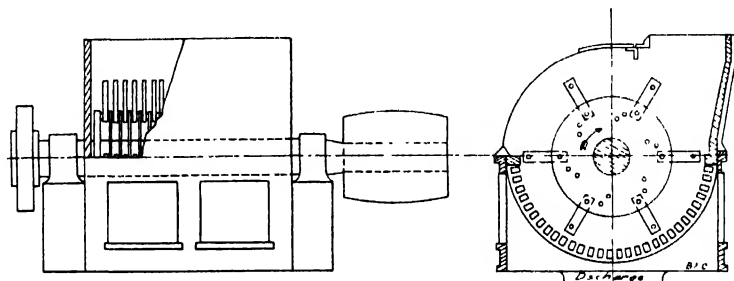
The Jeffrey crusher, illustrating the rotary hammermill type of disintegrating device.
